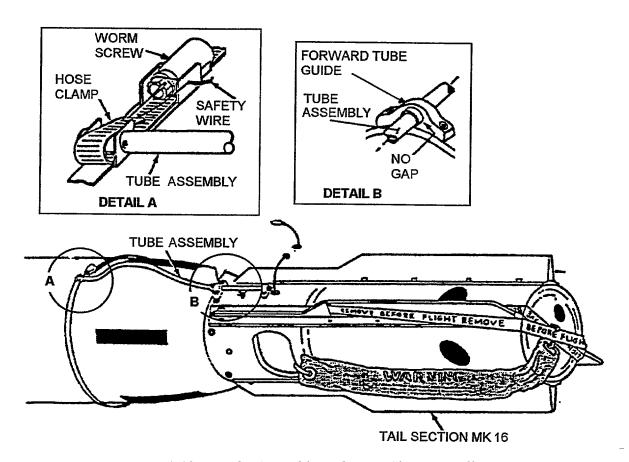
D. Tube Assembly and Hose Clamp Installation
